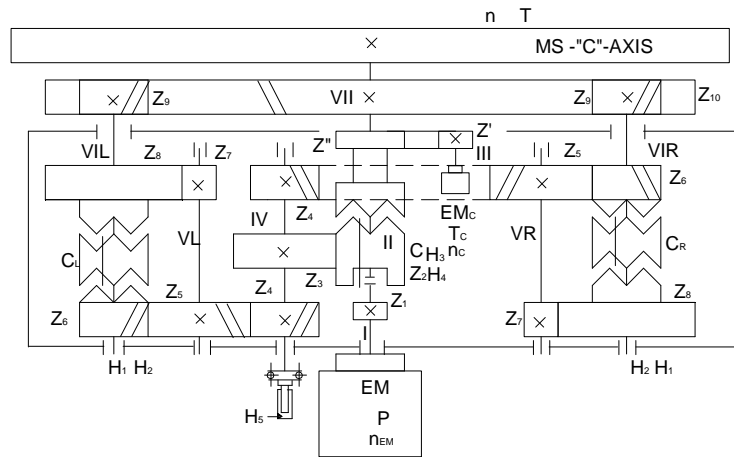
The speed and circular feed gearbox of the vertical lathe with the 5600 mm plate.
